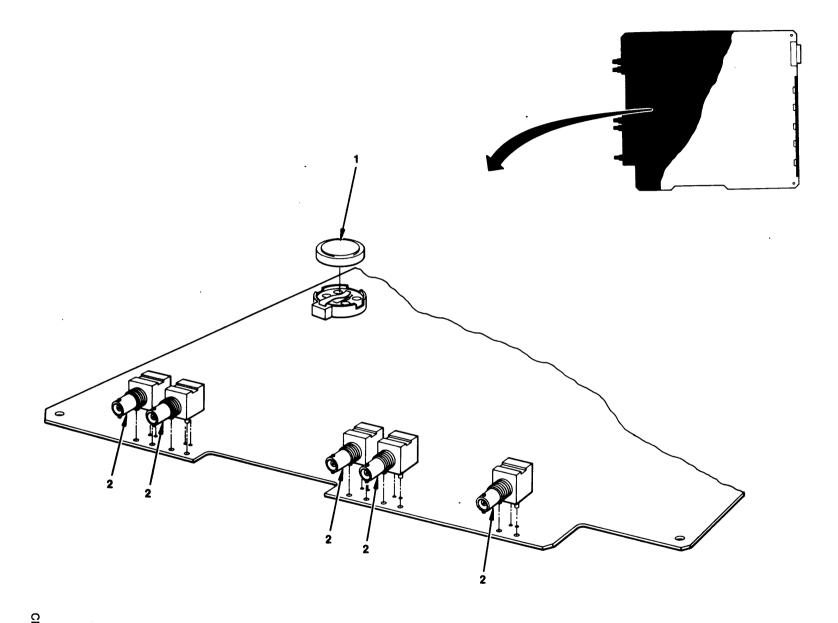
Mother Board Assembly (Sheet 1 of 2)
